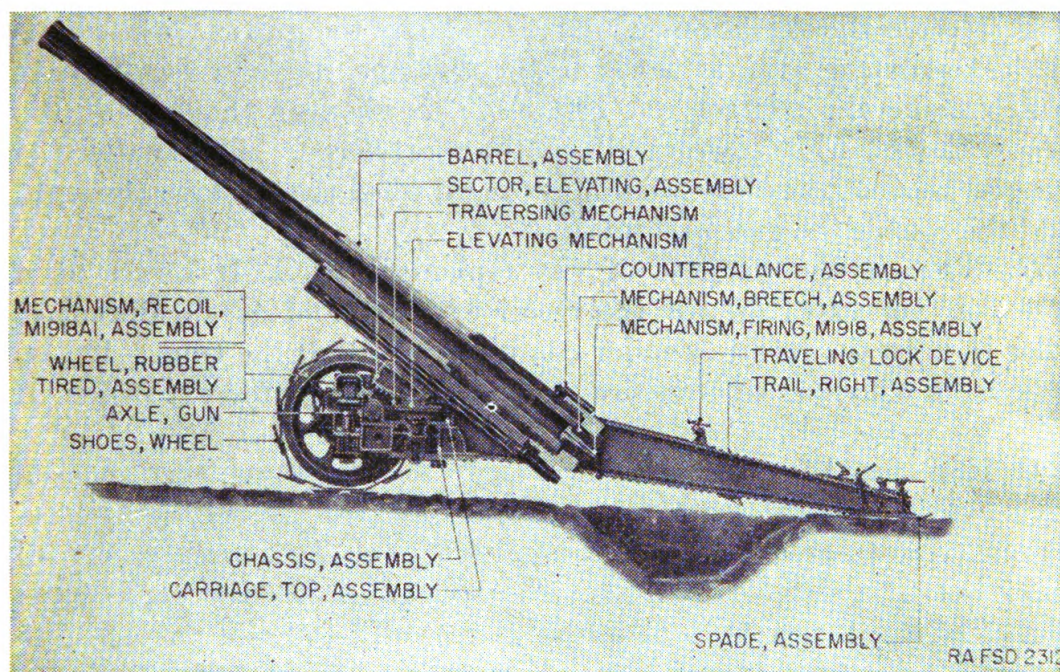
155-mm gun carriage—longitudinal section in battery.
